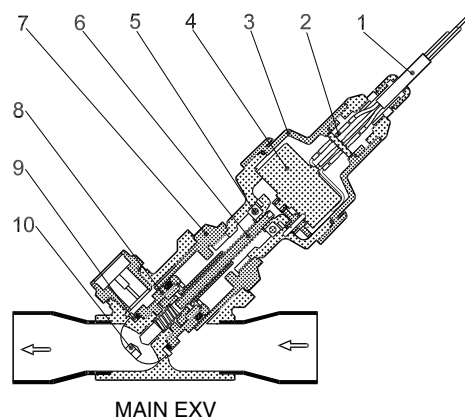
Cutaway Views of Electronic Expansion Valves (EXV) (P Compressor Only)
